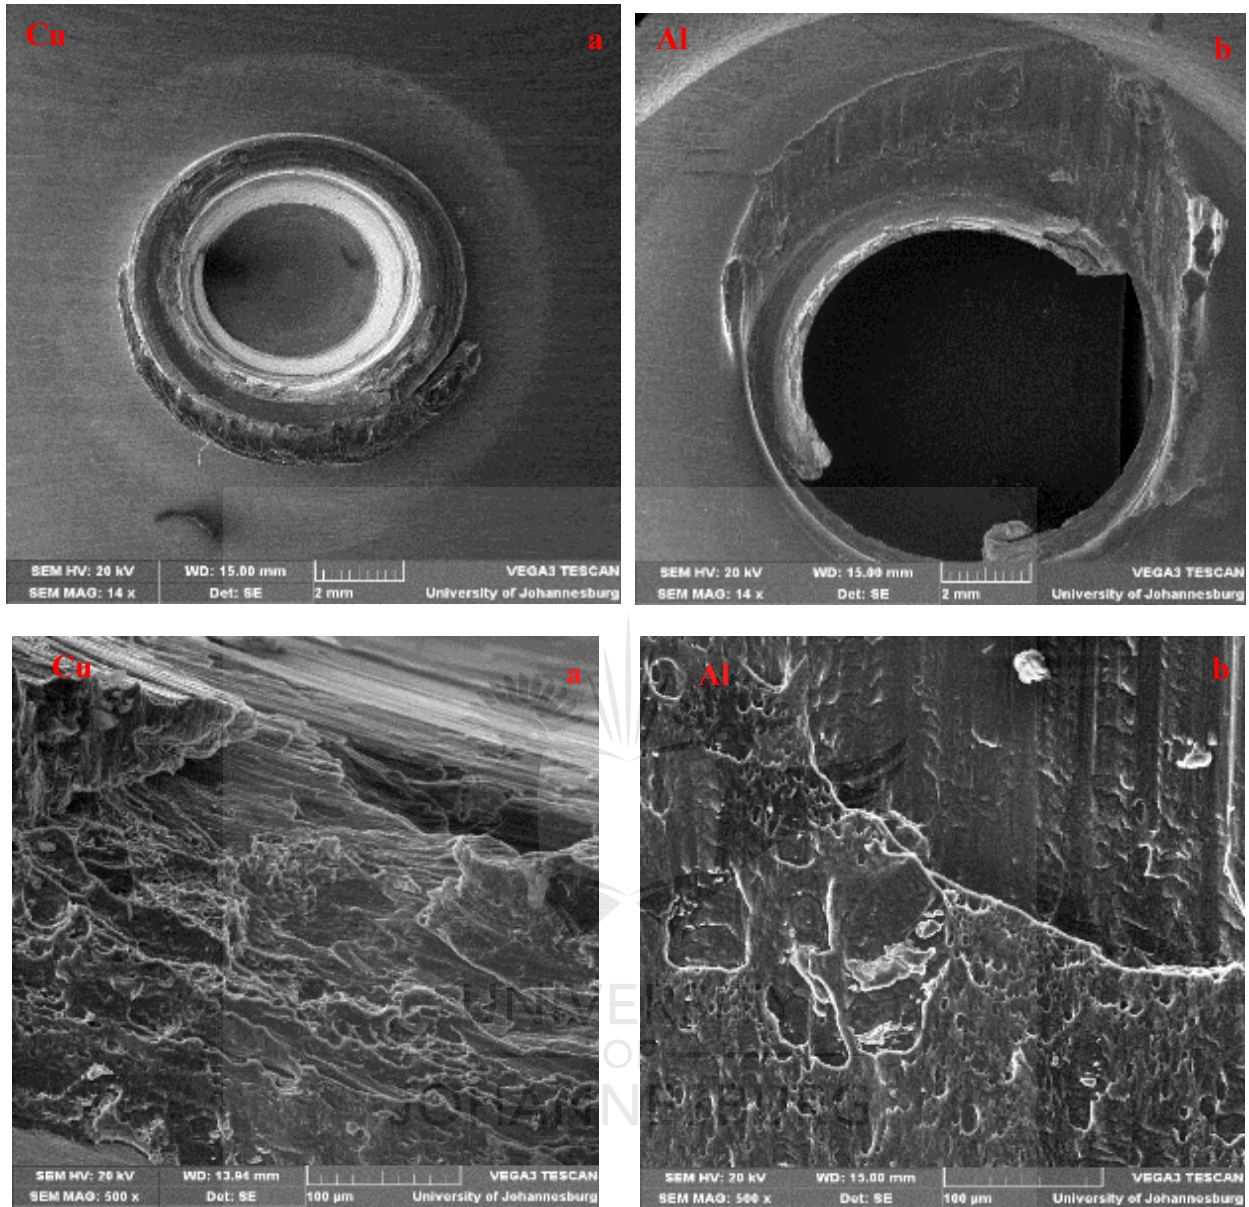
SEM images of spot weld produced using a conical pin and a concave shoulder tool; the rotation speed was 800 rpm and the shoulder plunge depth of 0.5mm, (a) failed nugget upper sheet (Cu), (b) the lower sheet (Al), (c) and (d) fractured surface on the copper and aluminium side, respectively
